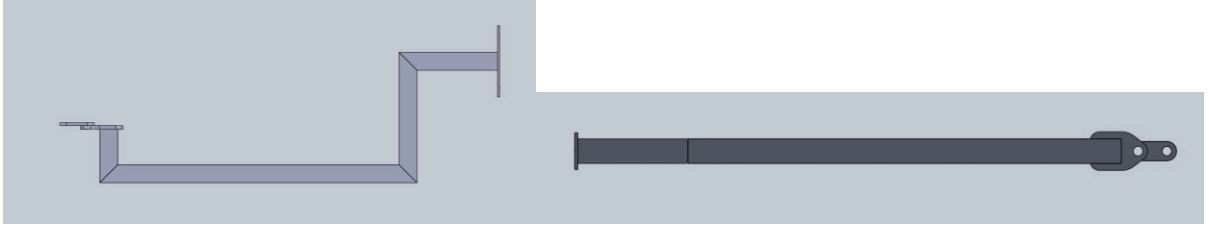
Welded Component of Mounting Top View and Mounting Side View
